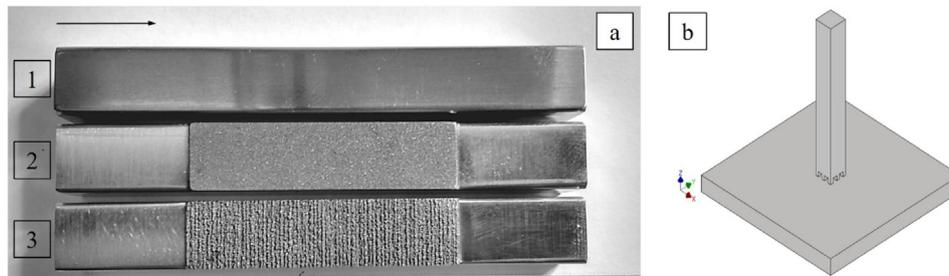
(a) Photograph of the bending fatigue specimens in different surface conditions. 1: machined specimen, 2: as-built SLM specimen, 3: as-built EBM specimen. (b) Schematic image of one of the bars on a build plate. Arrows in the images indicate the build direction.
